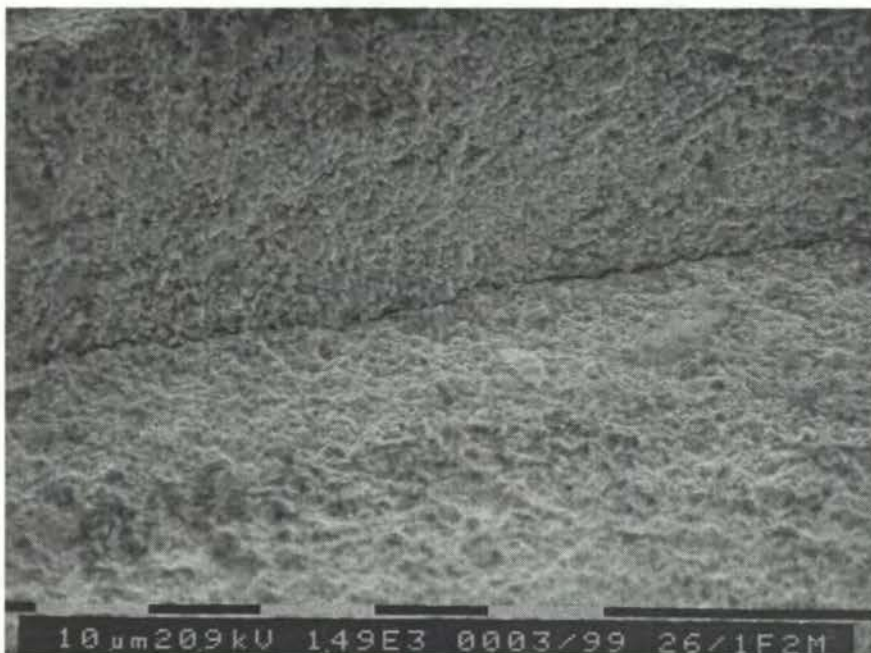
139 Magnified view of the failed KMF tool in Figure 7.134 showing crack in the fractured region after cutting Waspaloy for 2 minutes at 25 m/min and 0.14 mm/tooth
